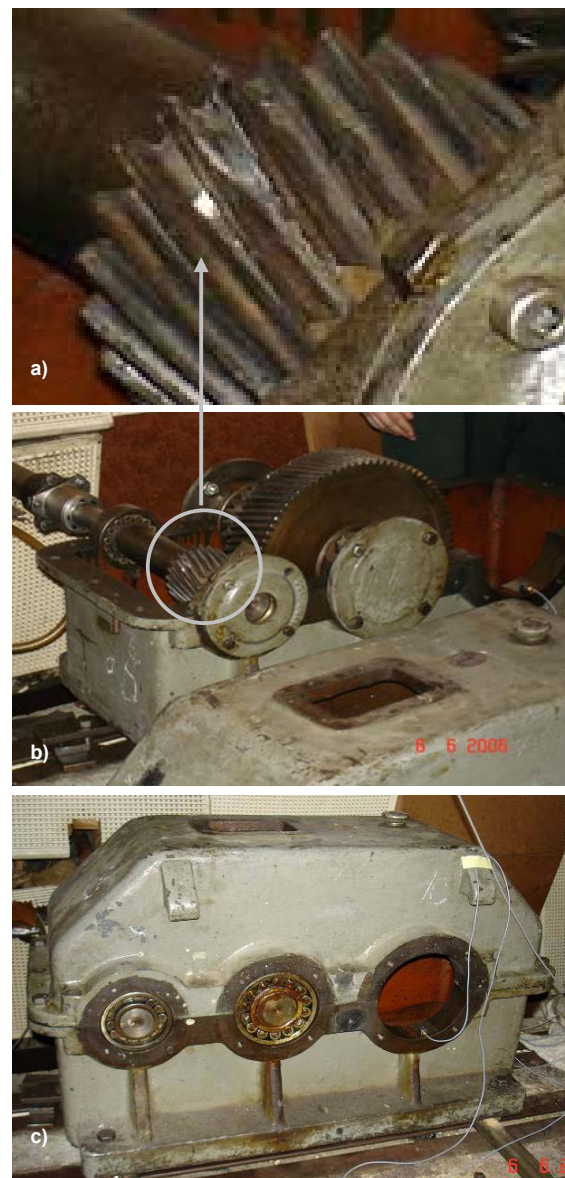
Gearbox testing: a) gears with defects, b) housing without cover, c) closed housing
